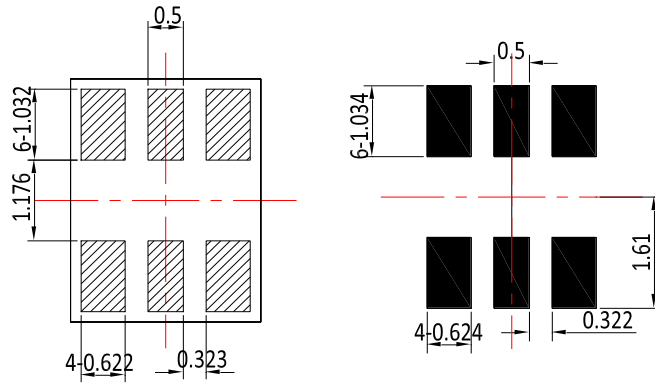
PCB Layout Pattern (Left), Solder Paste Stencil Pattern (Right)
